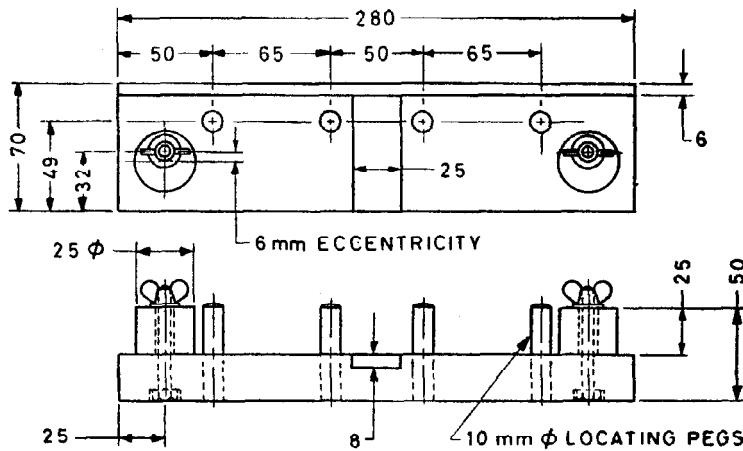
WOODEN JIG FOR LOCATING TEST PIECES IN CLAMP
